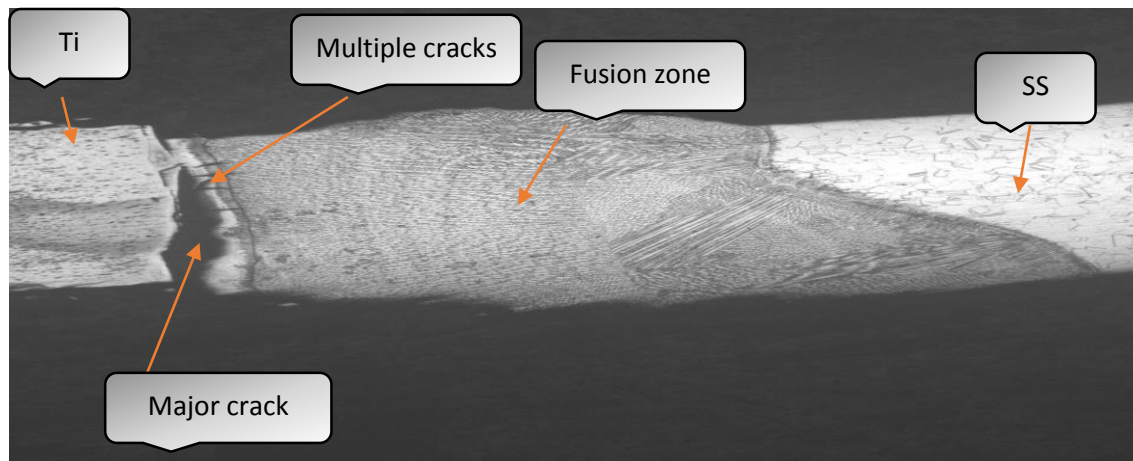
Cross-section of the weld using optical microscope (50x)
